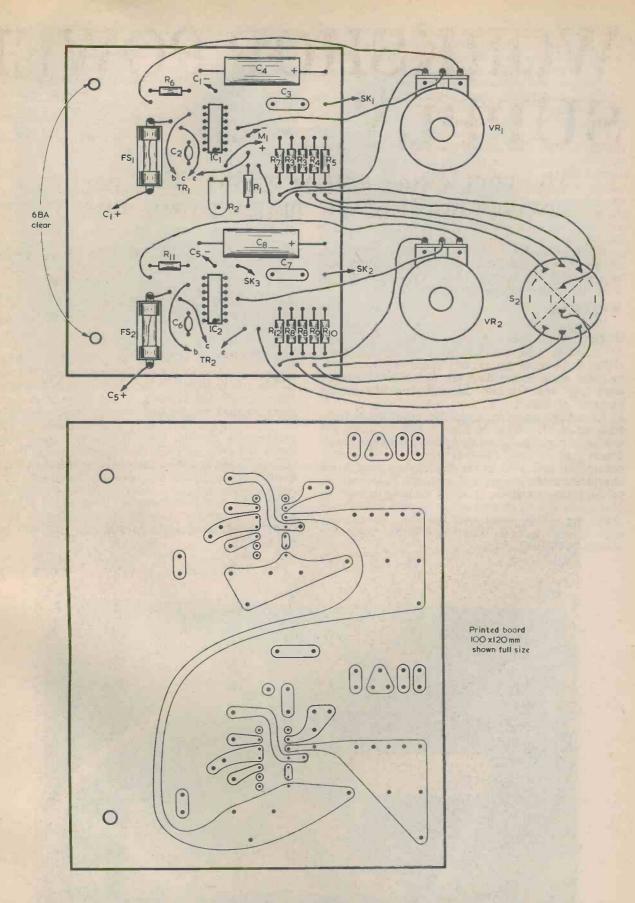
The printed circuit board for the workshop power supply is shown here actual size. It will be noted that there are two resistors marked R3 and two resistors marked R8. This is because R3 and R8 each consist of two resistors in parallel
